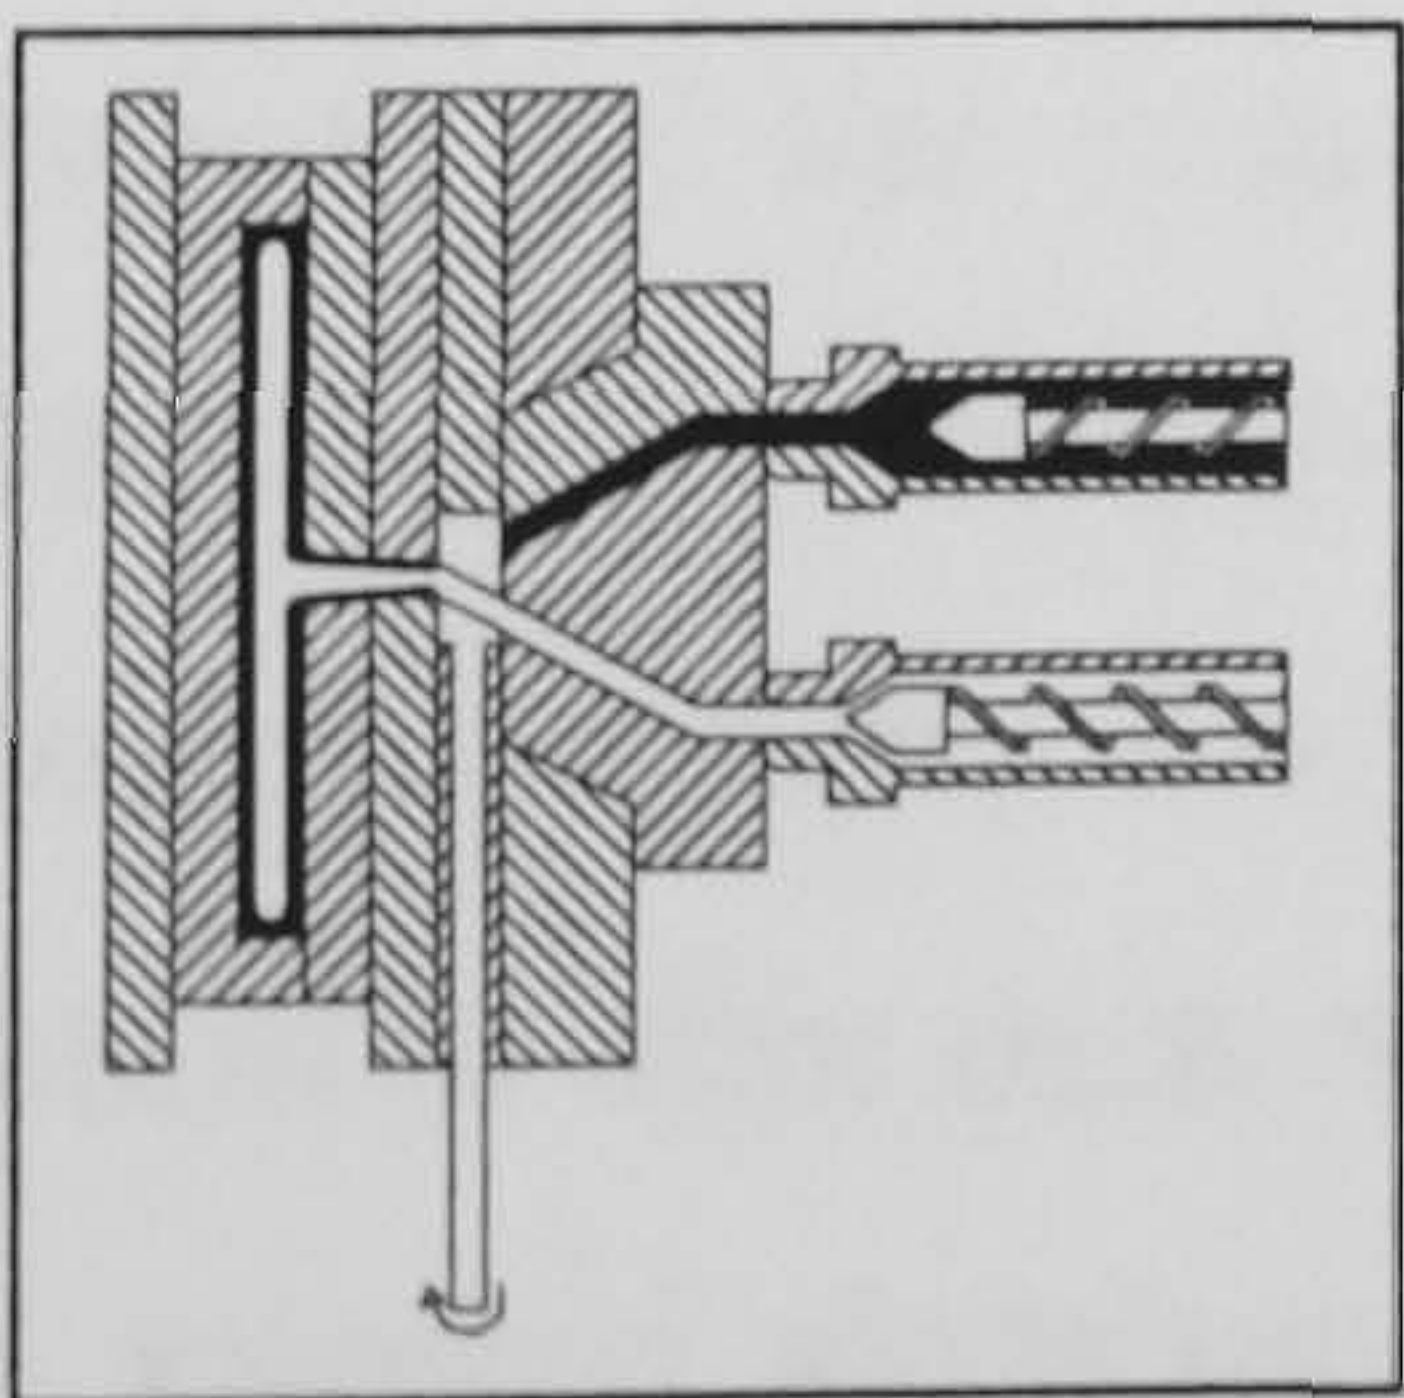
Diagram shows the mould filling principle of one-channel nozzle co-injection moulding process
